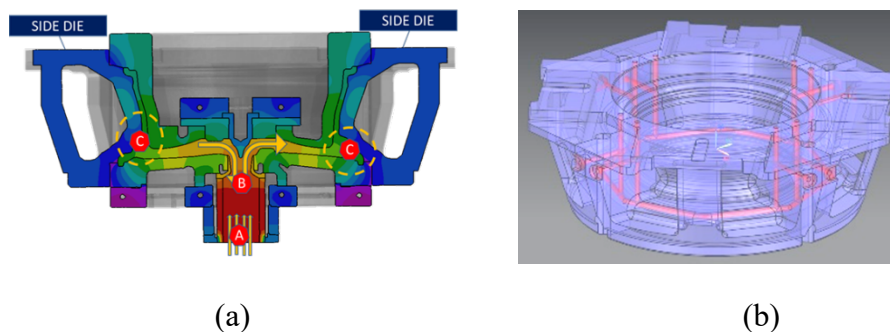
a -Visualization of main die and side die pieces ; b - Cooling chanel on Side Mold
